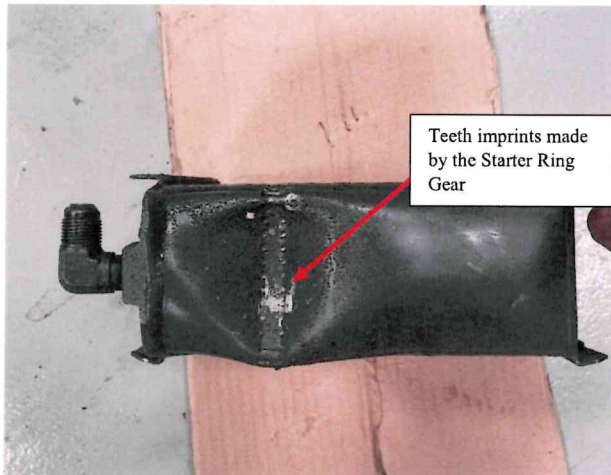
Picture shows the teeth imprints made by the Starter Ring Gear on the Oil Cooler.
